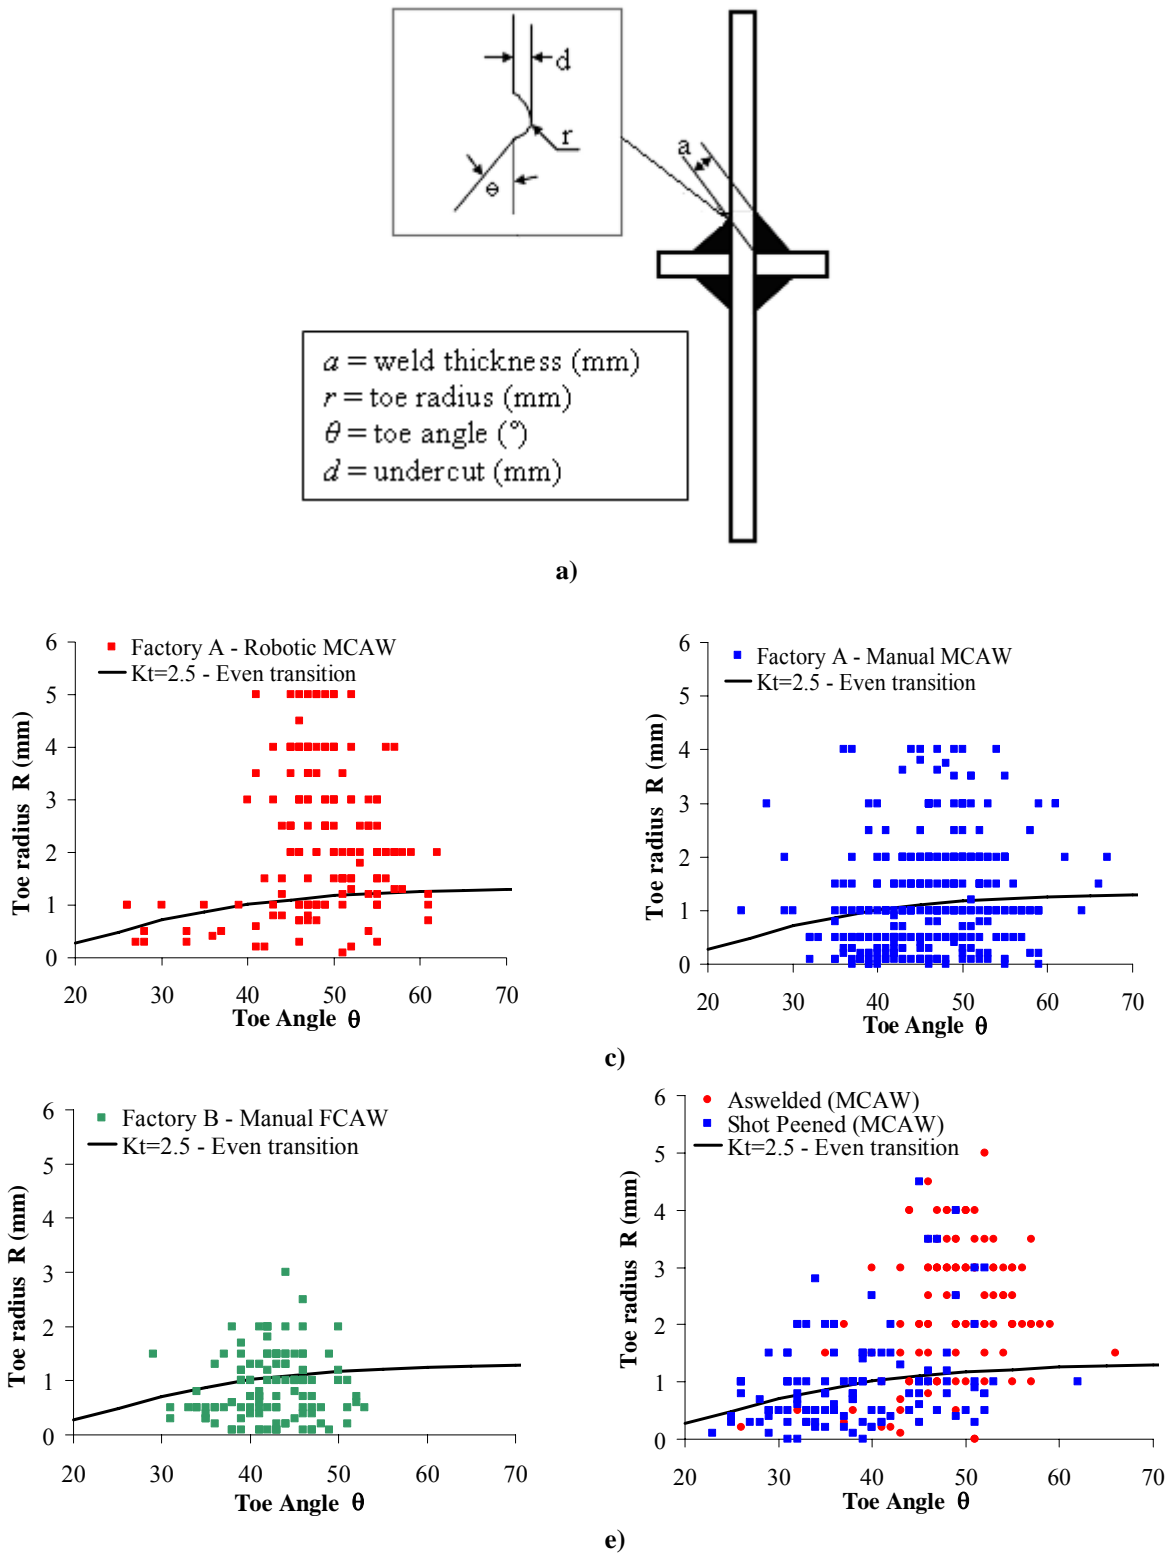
Local weld geometry: a) Cruciform joint and local weld geometry measurements ; b) Factory A (Robotic MCAW); c) Factory A (Manual MCAW); d) Factory B (Manual FCAW); e) before and after shot peening.
